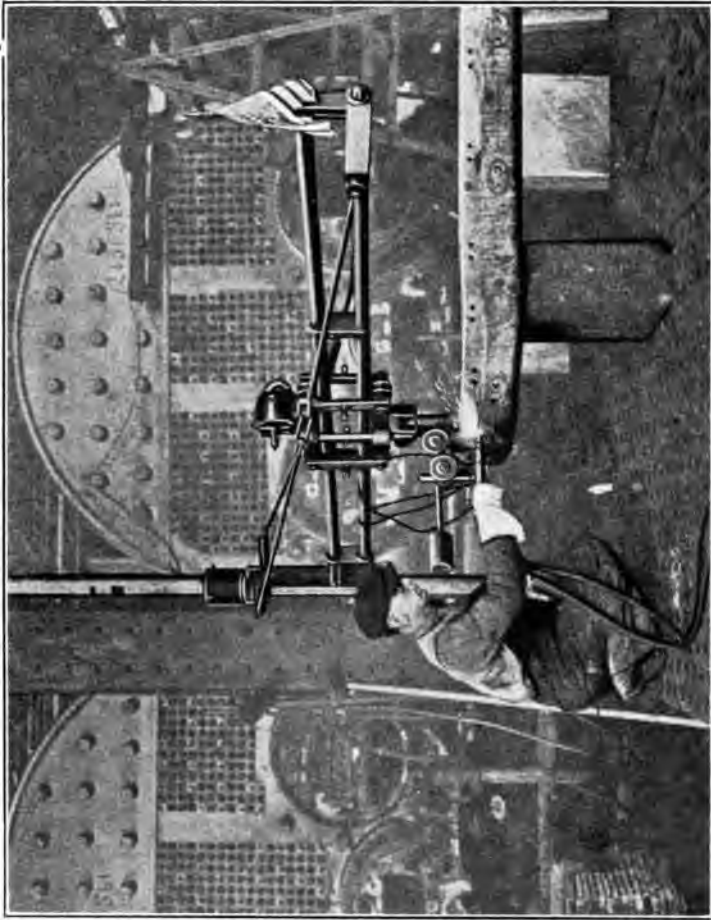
CUTTING ROUND THE FLANGE ON THE END OF A BOILER 8 FEET DIAMETER BY $1\frac{1}{2}$ INCHES THICK AUTOMATICALLY IN SIXTEEN MINUTES.
